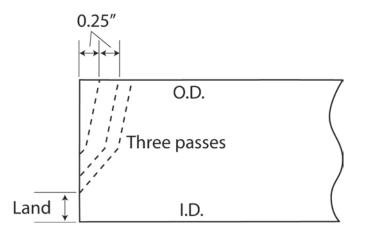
The diagram shows a compound bevel using multiple passes. Set the tool holder depth about 1/4" further back along the pipe O.D. for each pass.
